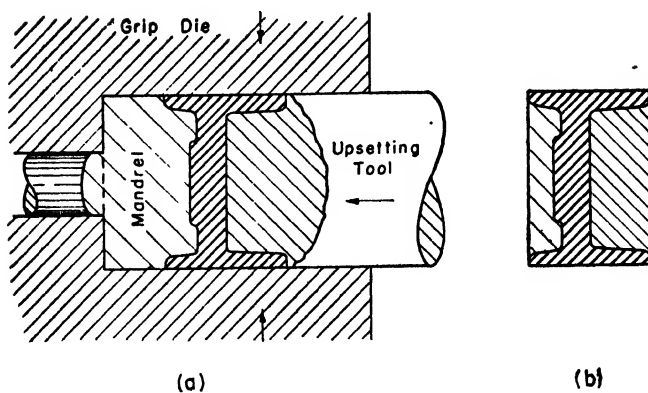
(a) Machine forging action; (b) The forged part. Compare with Fig. 14.30.
